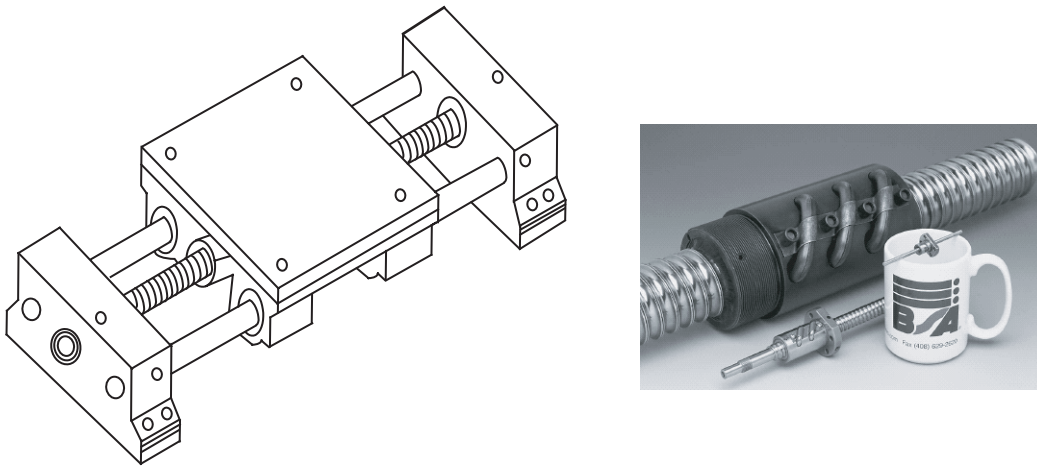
Rotary to translational motion conversion mechanism: lead-screw or ball-screw with linear guide bearings.
